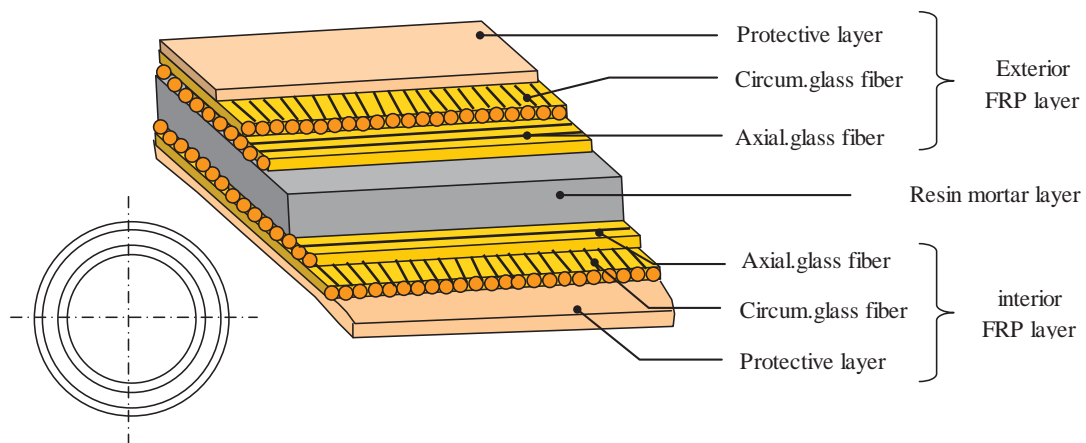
Cross section structure of FRPM pipes (Filament Winding)
